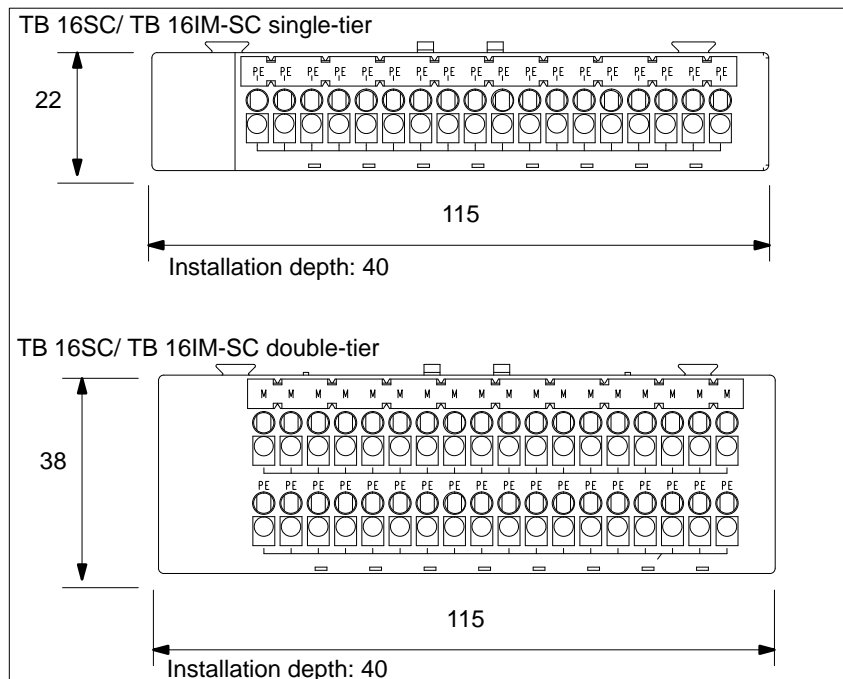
TB 16SC/TB 16IM-SC Supplementary Terminals, Dimension Drawing
